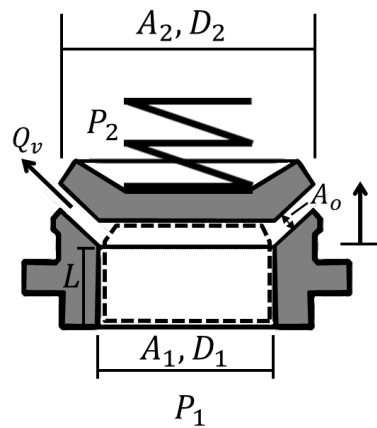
DIAGRAM OF DISK STYLE CHECK VALVE USED IN THE PUMPING CHAMBER SHOWING CRITICAL DIMENSIONS
